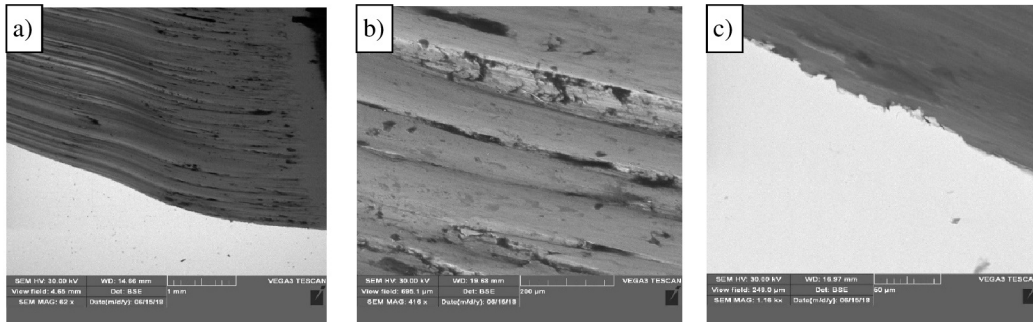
Analysis of zone III for a tool which has produced 900 forgings
